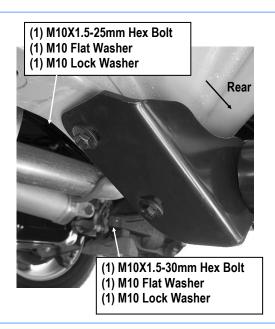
M10 Single Nut Plate Installation (On the Driver Side Rear Mounting Location)
